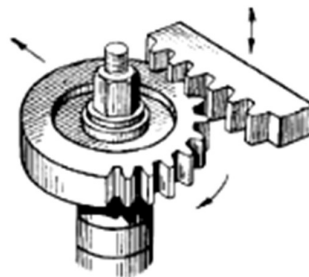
External gear teeth generation by rack type cutter (Sunderland method) [6]
